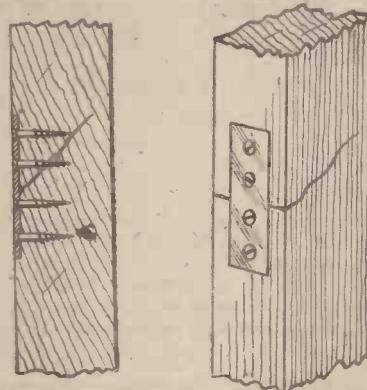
Details of a neat repair to a fractured piece of furniture.
